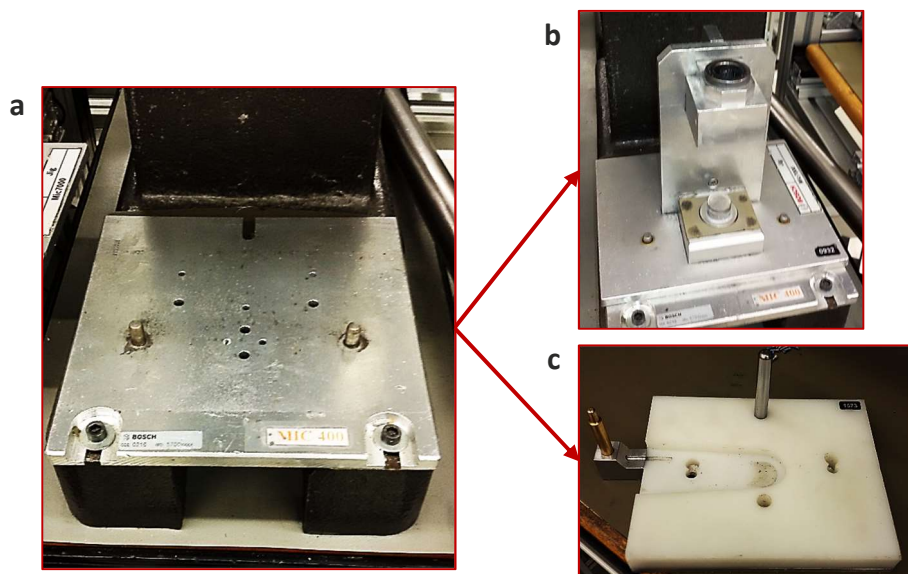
a) Manual press equipment; b) The fixture to press fit bearings and leap seals; c) Press fit tilt gear.
